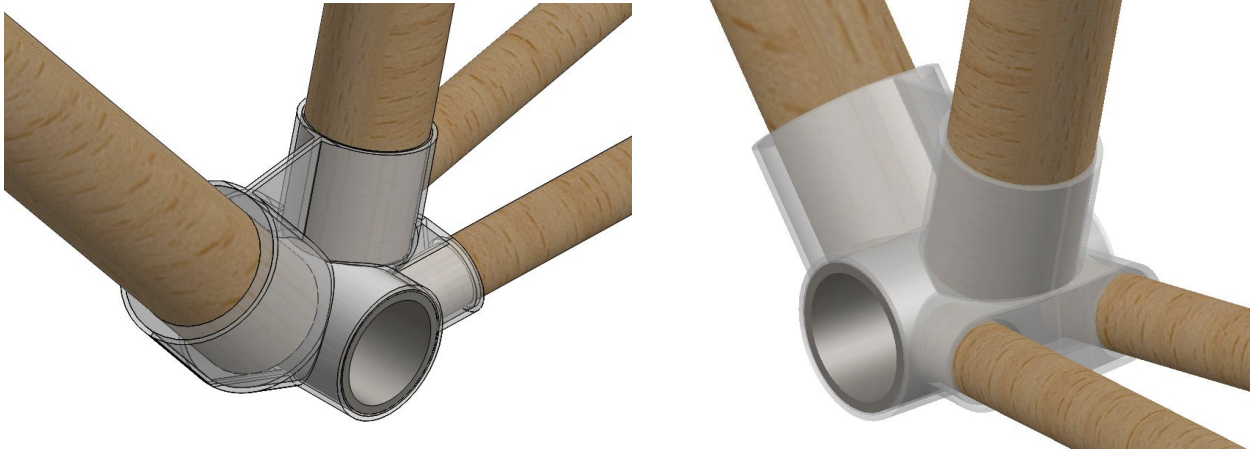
Bottom bracket joint view 1(left) view 2(right)
